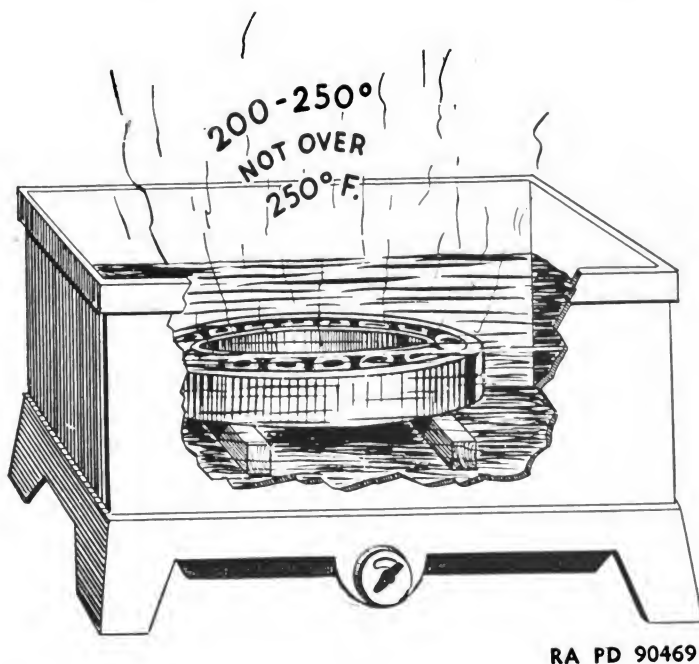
Support bearing on blocks, well away from bottom. Don't keep bearings in hot oil or oven after correct temperature is reached.
